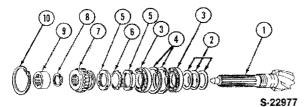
Pinion Gear Assembly - FWD Model Shown Model 1720
